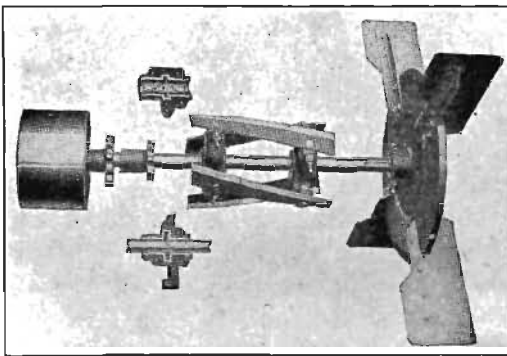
Cylinder cutting head, fan, and pulley mounted on the same shaft.
